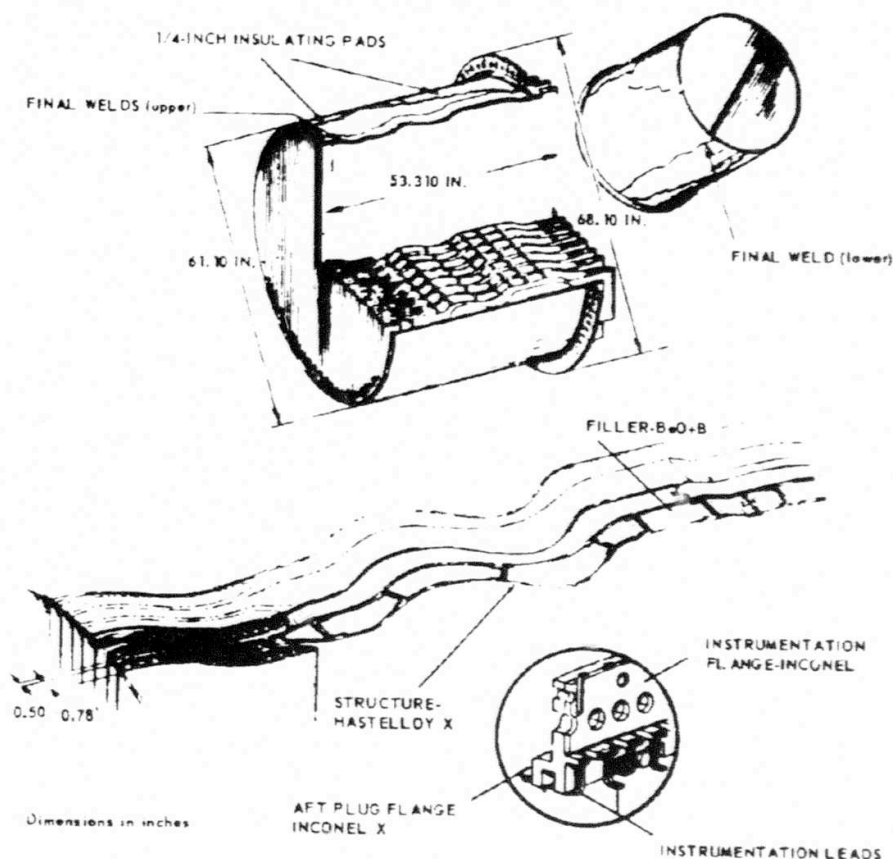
Rear shield assembly (Dwg G-1286-Rev. 4)
